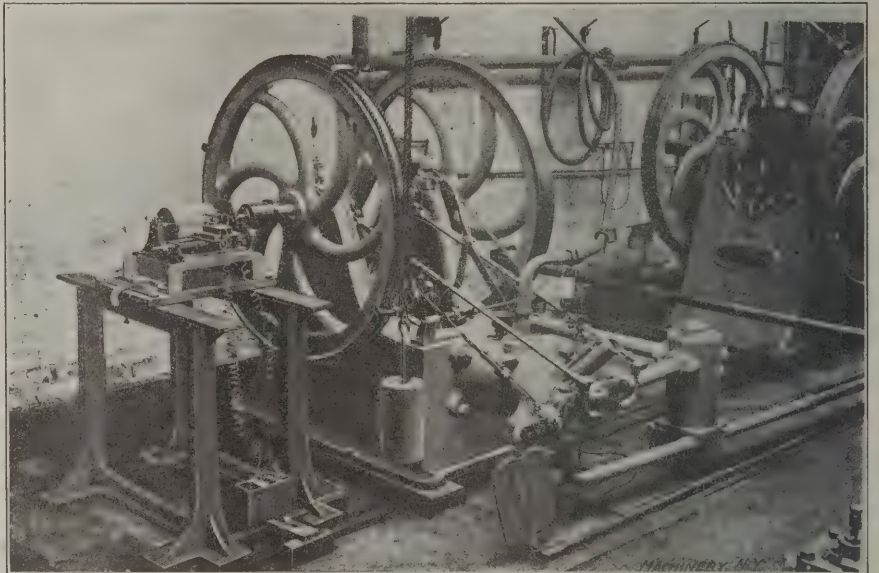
The Apparatus in Use in Testing an Atkinson Gas Engine.
